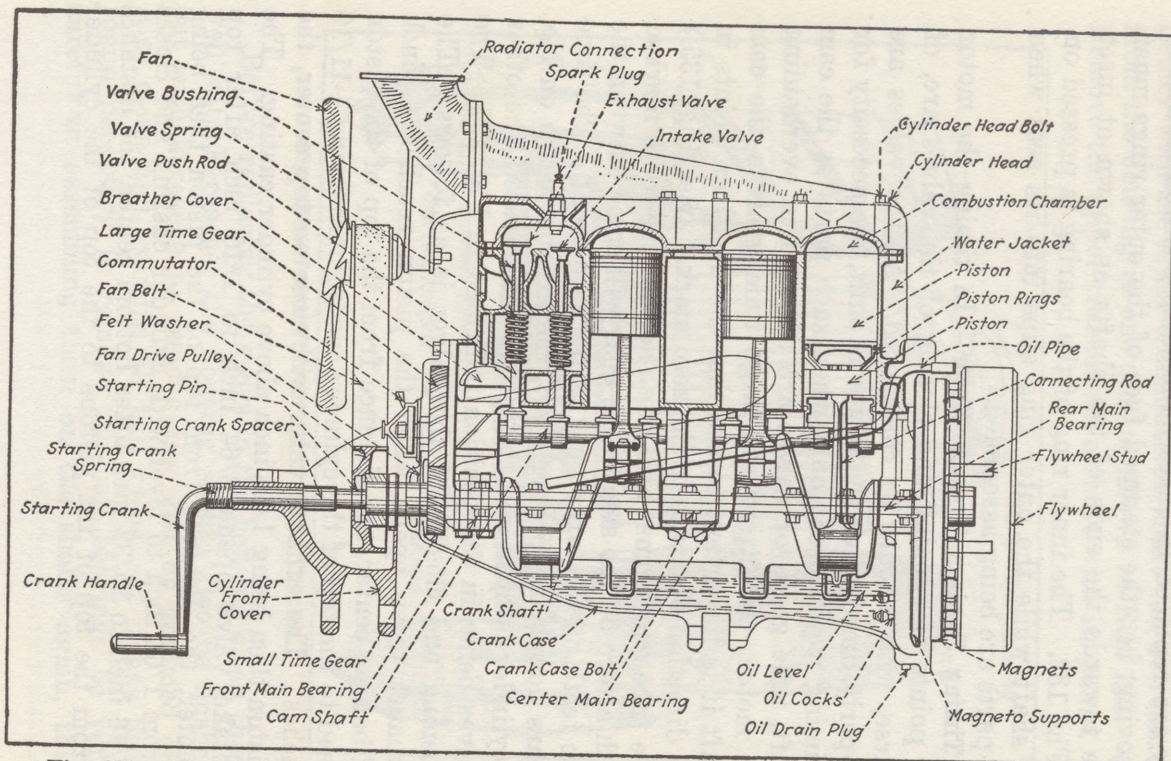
Phantom View of the Fordson Tractor Engine Showing Relation of the Various Parts Comprising the Power Plant Assembly.
